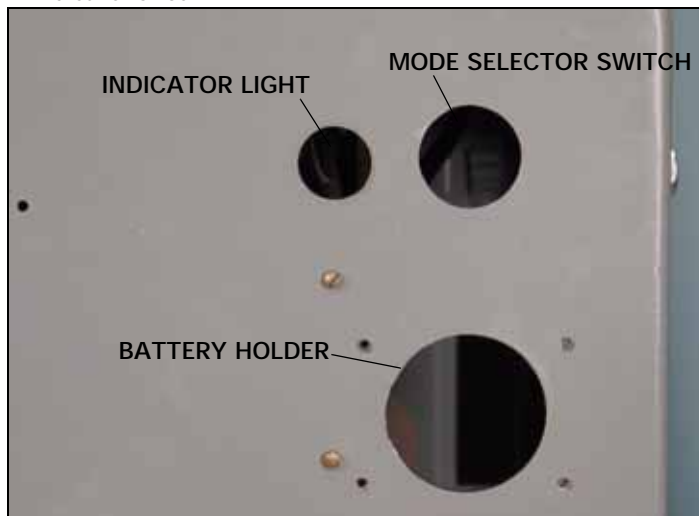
Mode Selector Switch, Indicator Light, and Battery Holder Holes Cut in the Mounting Surface.
